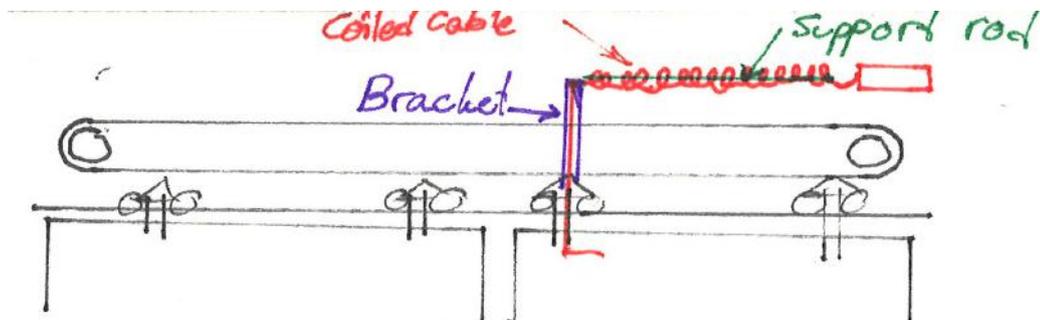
Concept 11 - Spiral Cable on Support Rod. A spiral cable is mounted on top of a support rod mounted in the header profile. A stiff bracket mounted on the door leaf carriage guides the spiral cable when it retracts and expands as the door slides to its open and closed position.
